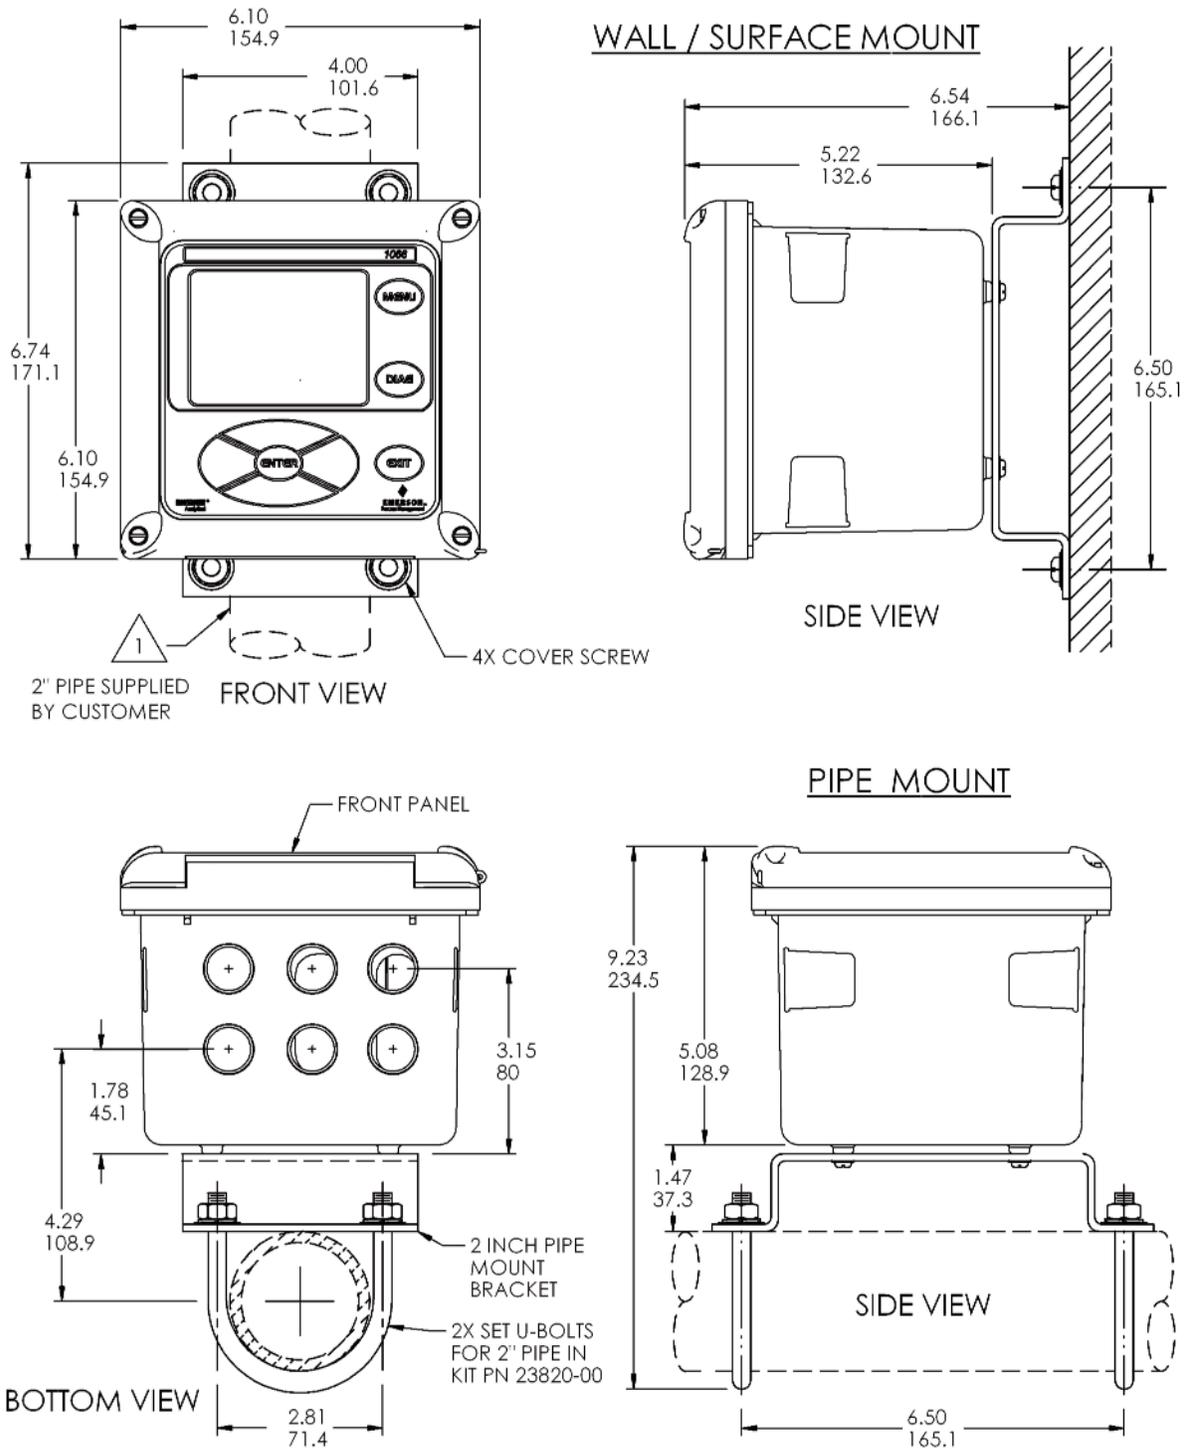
Pipe and wall mounting dimensions (Mounting bracket PN: 23820-00)
